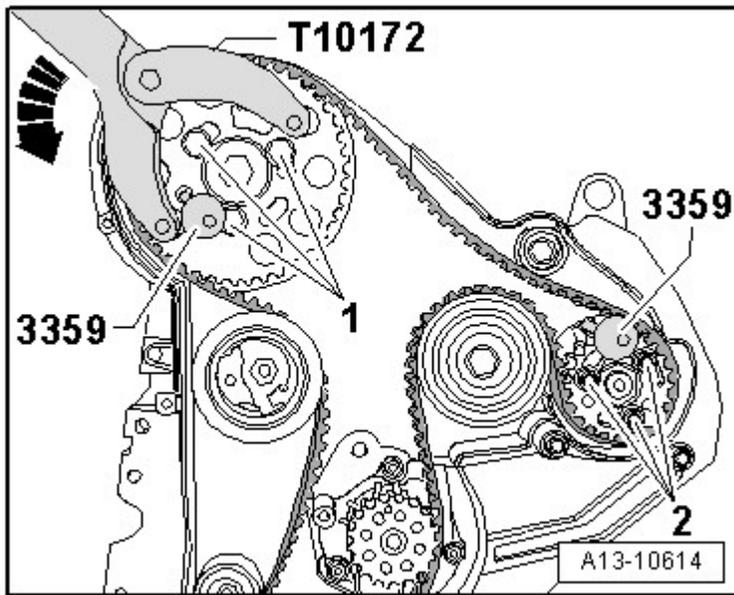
Mounting T10172 On Camshaft Toothed Belt Gear
